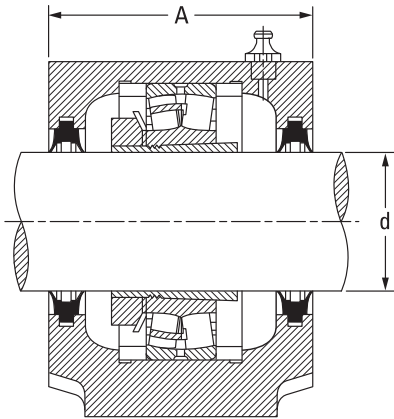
Spherical roller bearing mounted with an adapter sleeve.
